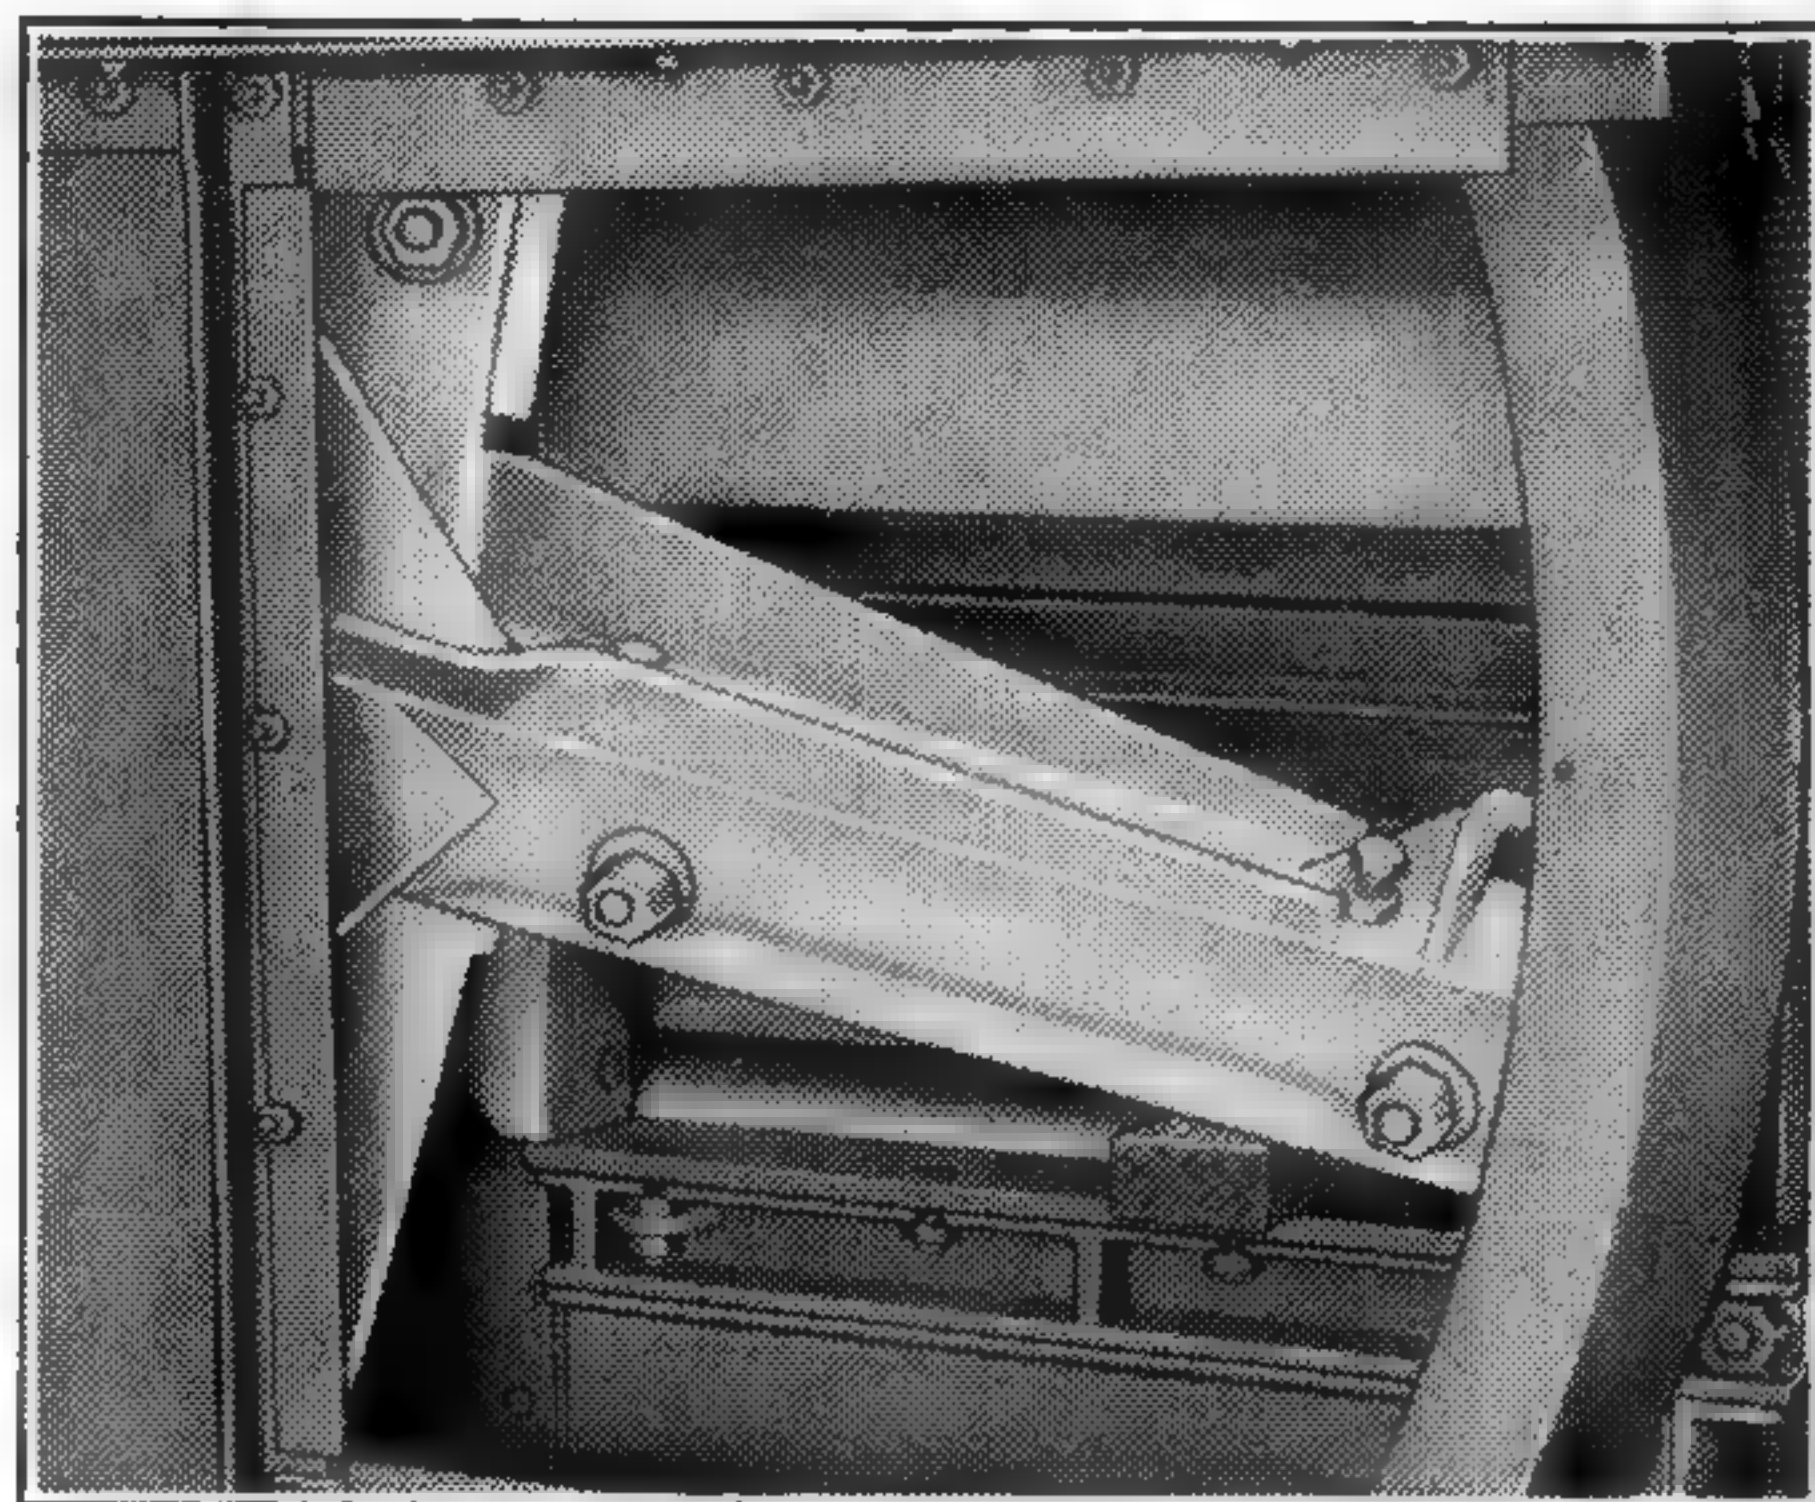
Inspection panel removed to show position and setting of radial knives and shear plate.
